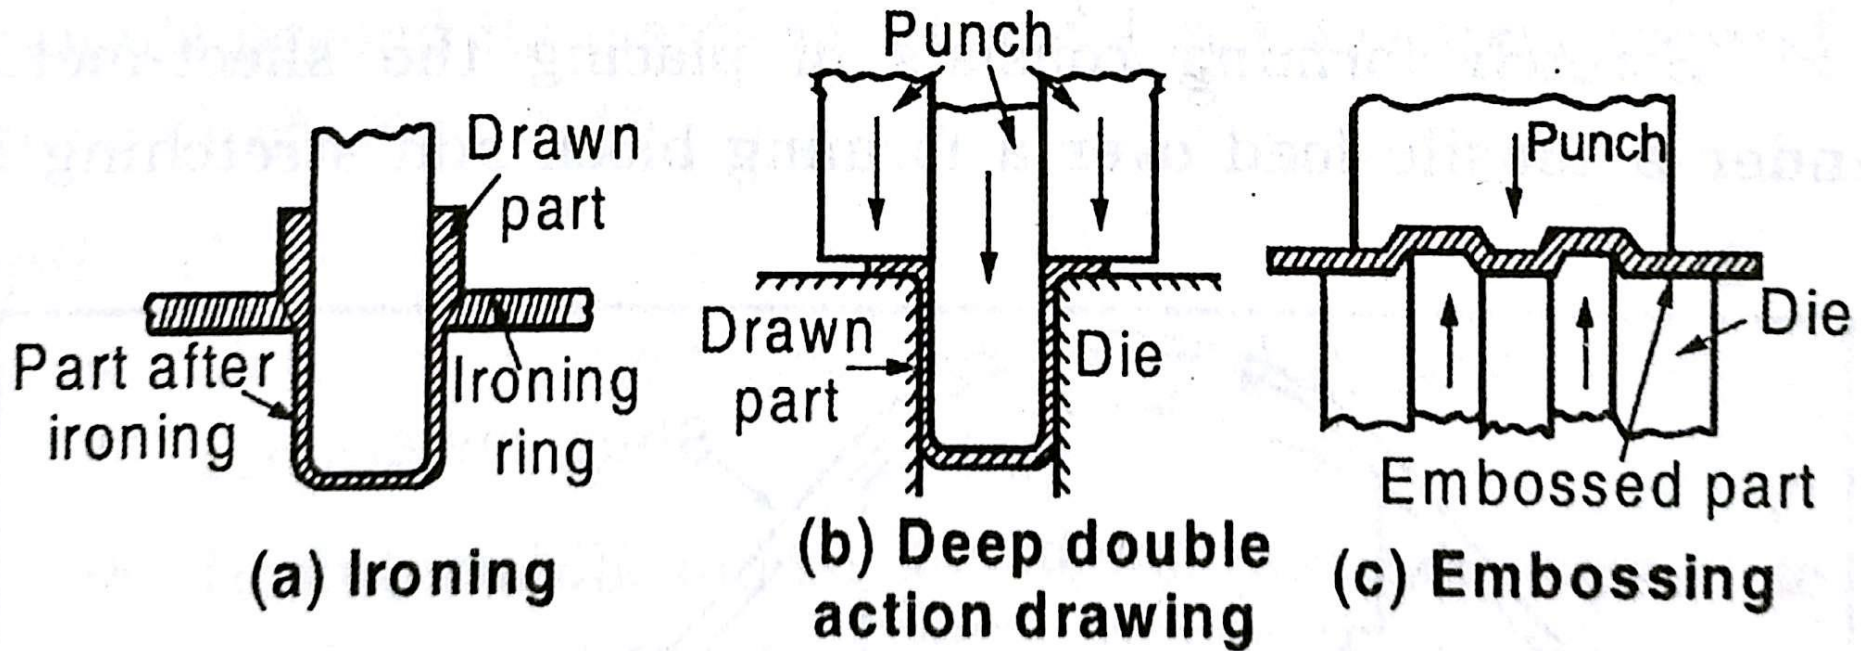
Sheet-metal drawing operations, (a) ironing is the operation in which wall thickness of a drawn part is made constant by pushing the drawn part through ironing rings, (b) deep drawing with double action drawing, (c) embossing is stretching the sheet-metal blank into desired shape under a punch and die.
